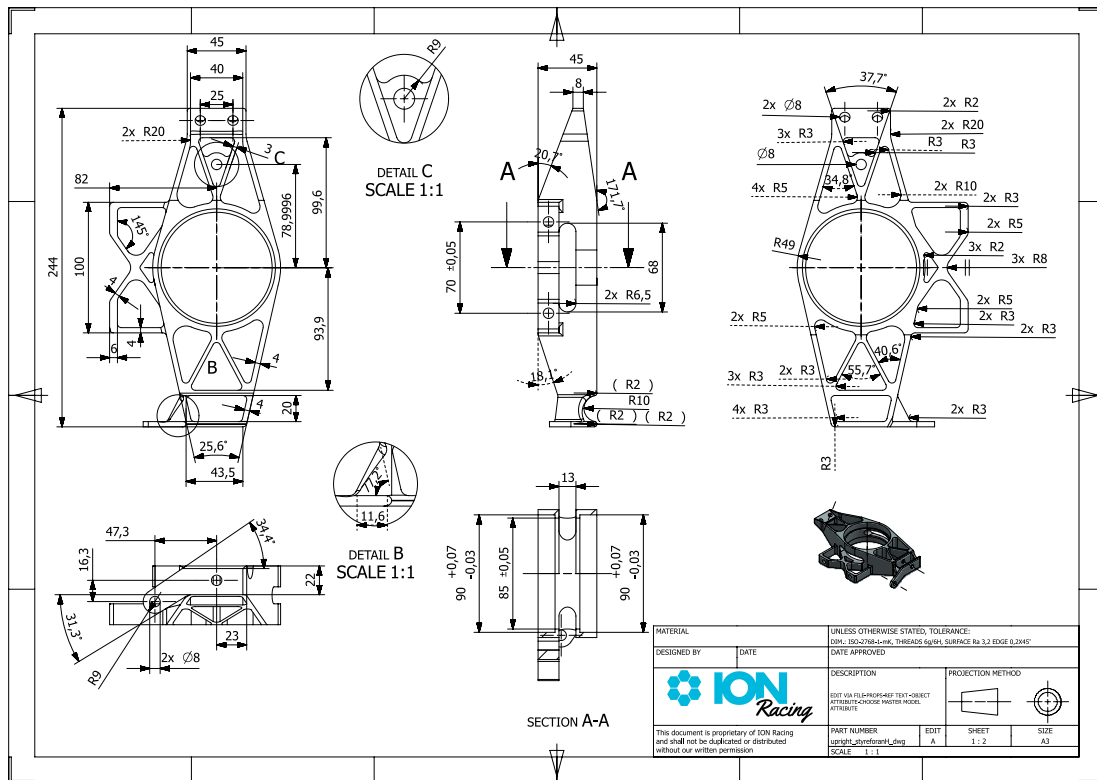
Engineering drawings of part III: The metal race car front upright[16]
